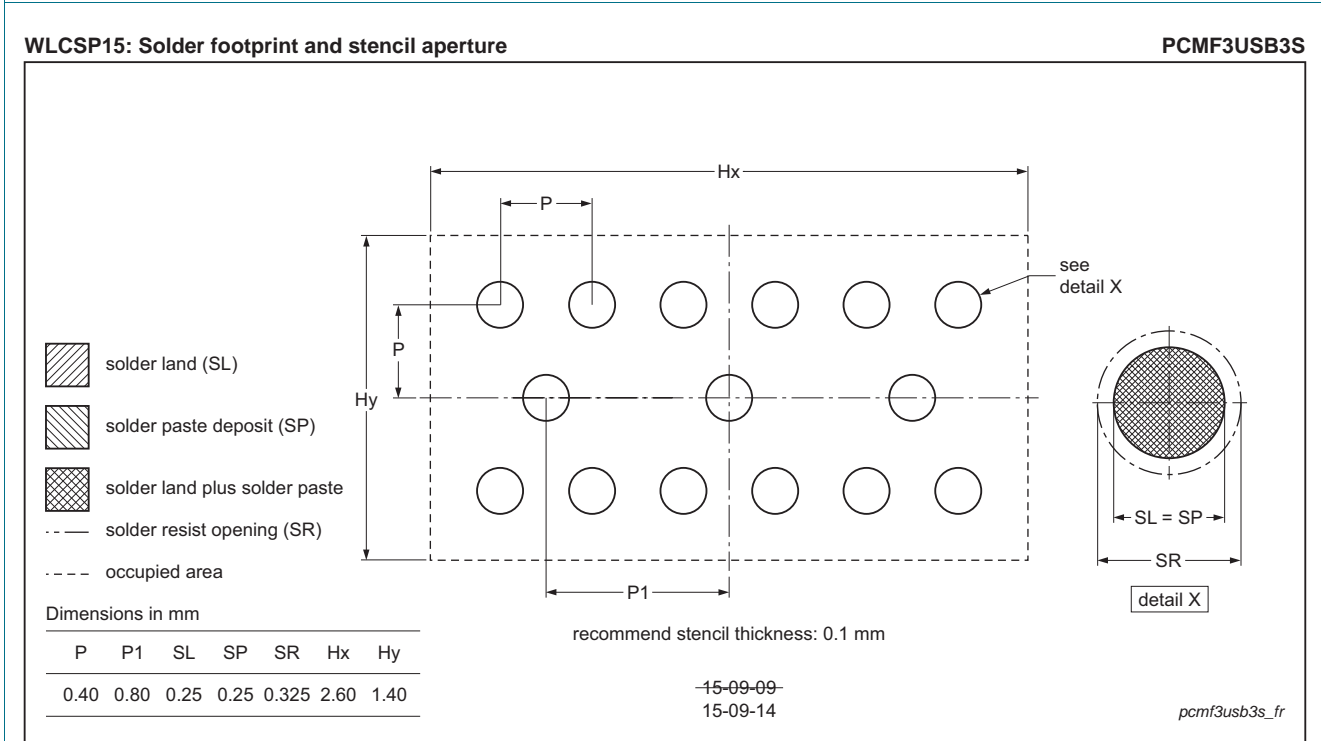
Soldering footprint WLCSP15 (PCMF3USB3S)
